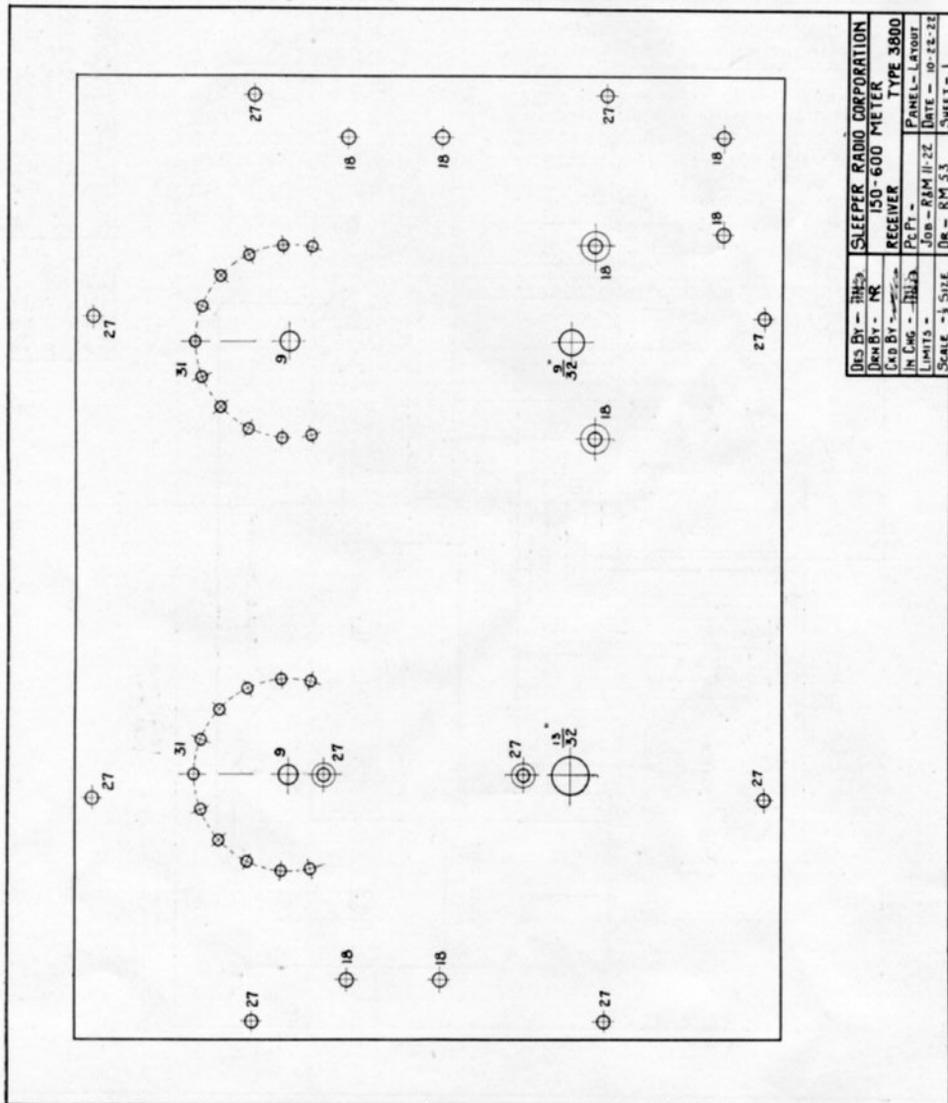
One-half scale drawing of the front panel. To get true dimensions double each distance measured on the drawing
